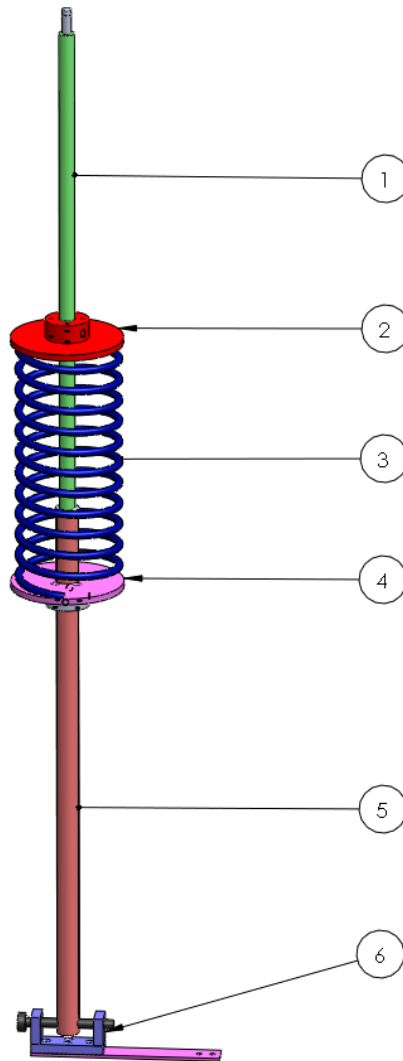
Coil spring exoskeleton mechanism, shown as a CAD assembly. The inner telescoping rod (1) is fixed by a removable lynch pin to the upper spring plate (2). The two spring plates (2 and 4) compress the coil spring (3). The outer telescoping rod (5) is fixed by set screws to the lower spring plate (4). At the distal end of the outer telescoping rod, a lynch pin secures the ankle joint assembly (6) to the exoskeleton spring. The hip joint of the coil spring exoskeleton is interchangeable with the hip joint of the bow spring mechanism.
